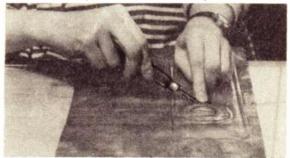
The modelling tool is being used here on the face of the sheeting to flatten the edge of the design. Note difference in holding.
